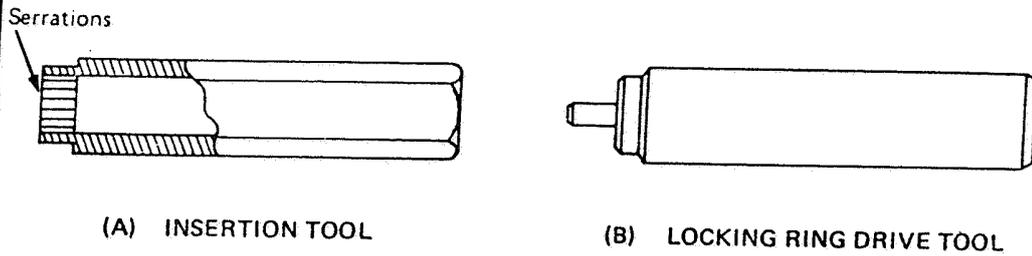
TOOLS FOR RING-LOCKED INSERTS
